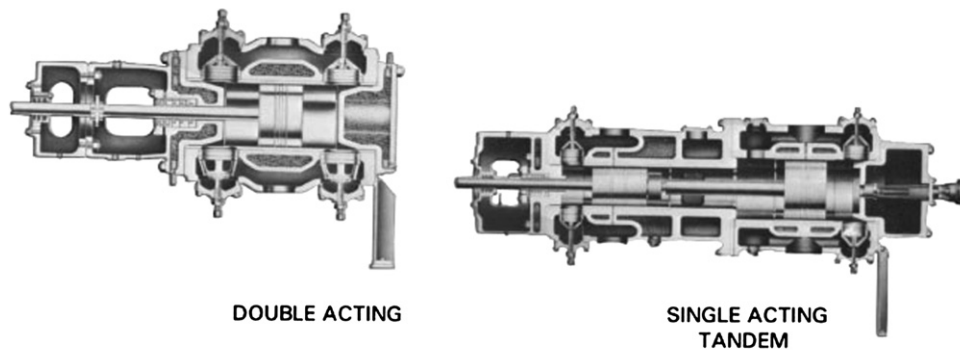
• Cylinder and liner (Courtesy of Dresser Rand)
